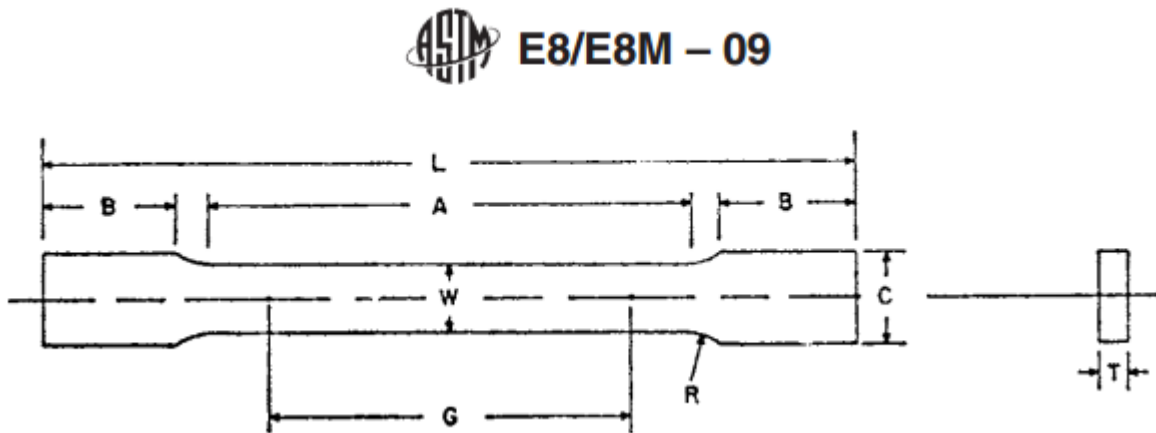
ASTM E8/E8M sub-size tensile standard used for tensile tests
